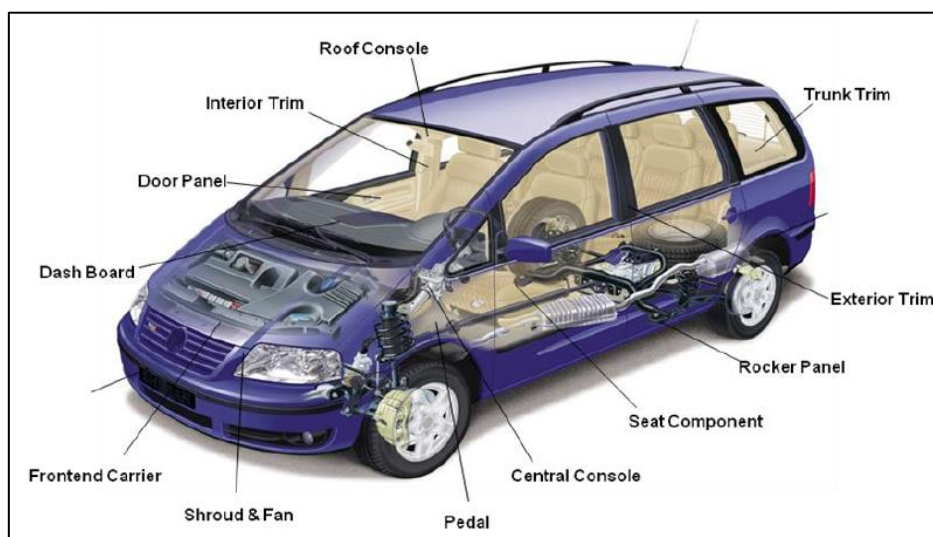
6 - Parts of a car, produced at SIMOLDES.
